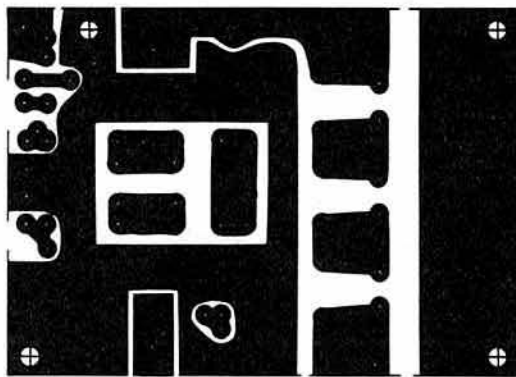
PCB layout of Fig 17. PCB 2.625 by 1.875in, single-sided
